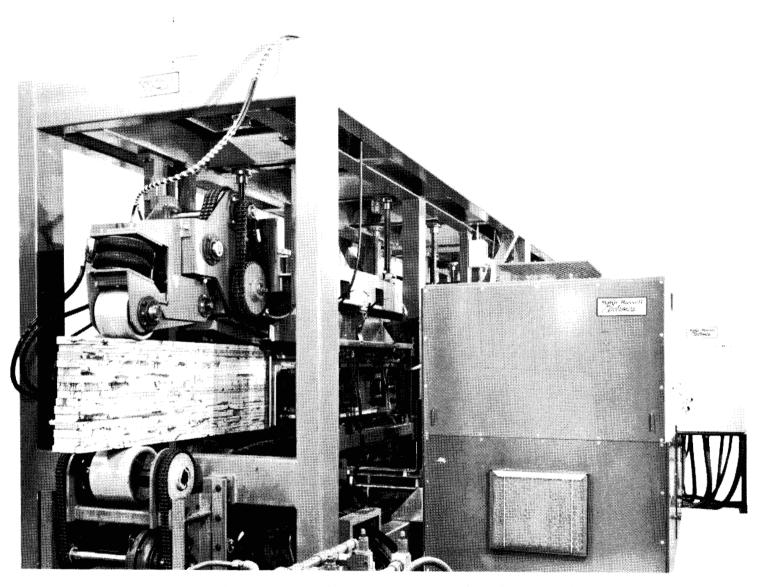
A view of a laminated beam fabrication machine. The electrodes are at center. This machine is normally installed in a shielded room. The central large cabinet is the generator Photo courtesy of Mann-Russell Electronics, Inc.
